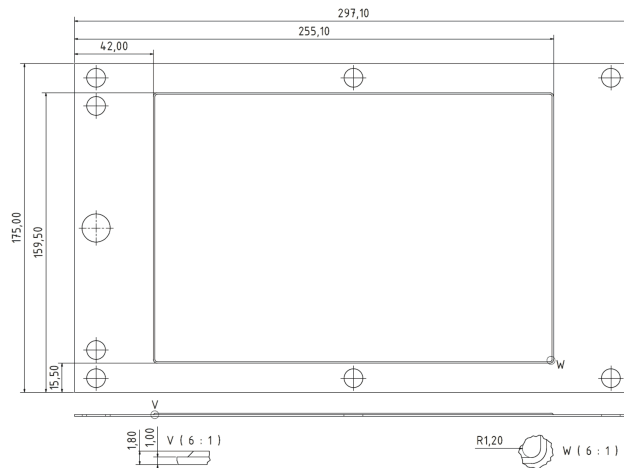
Dimensions of the manifold cover: Bottom view of the manifold cover. All dimensions are in mm. (Todt 2011)
